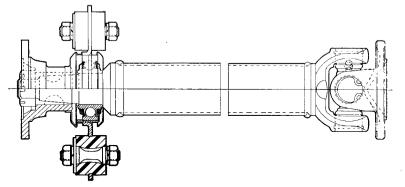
Front propeller shaft and centre bearing-Automatic transmission model.
